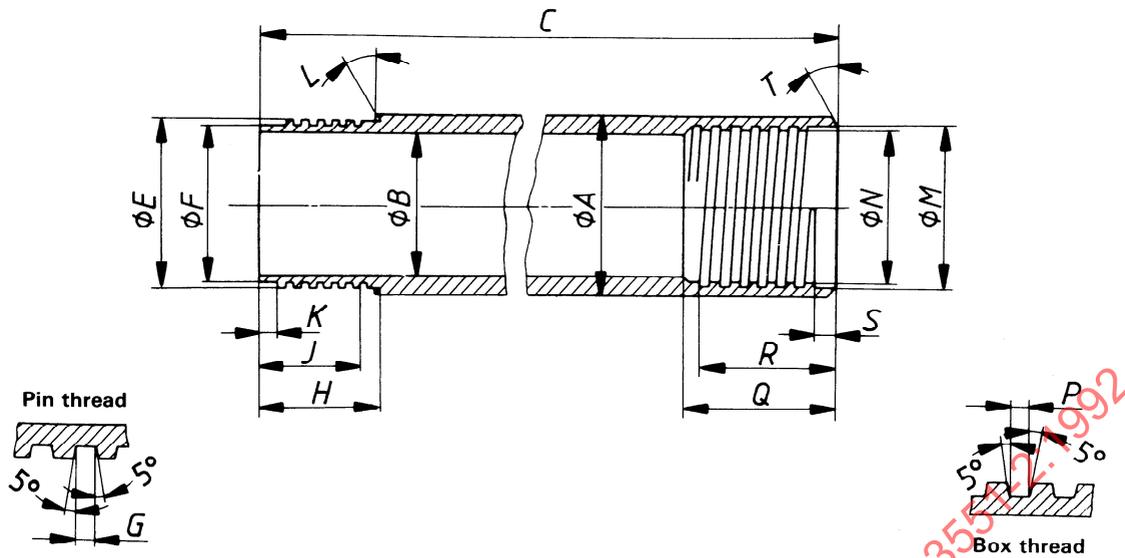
"WF" design double-tube core barrel — Outer tube (see table 25)
